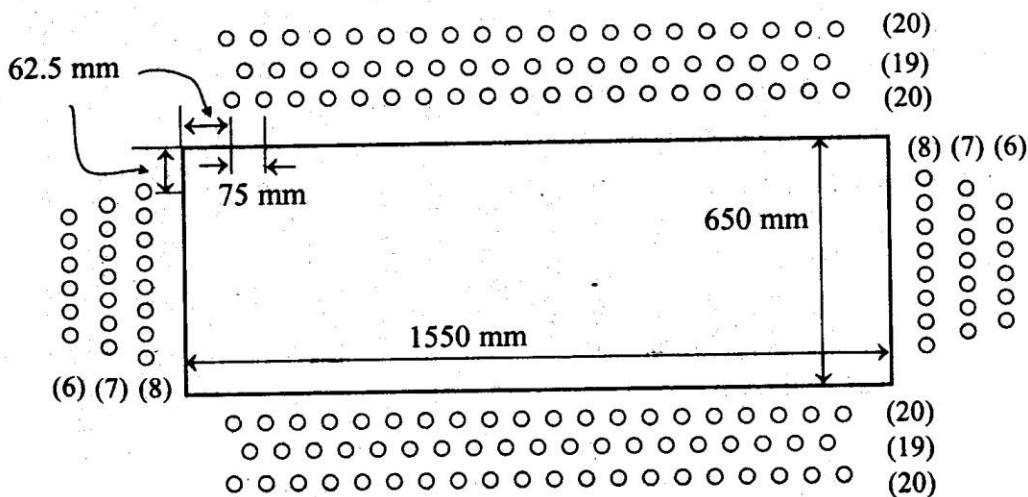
Plan showing the arrangement of cooling tubes for example 4.7
